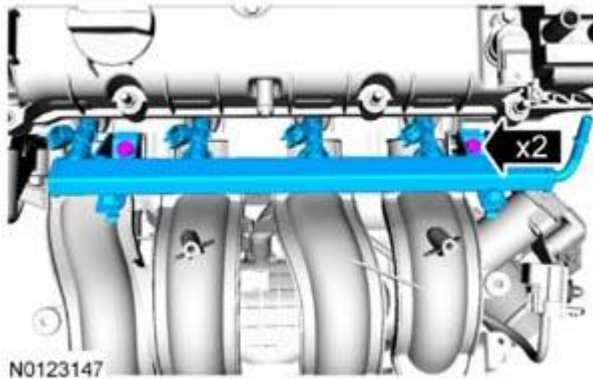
Identifying Fuel Rail Assembly And Bolts
